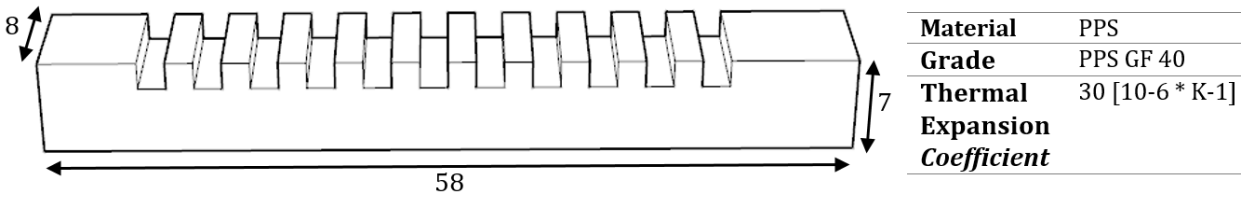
Step gauge: overall dimensions and material properties, dimensions are expressed in mm.
